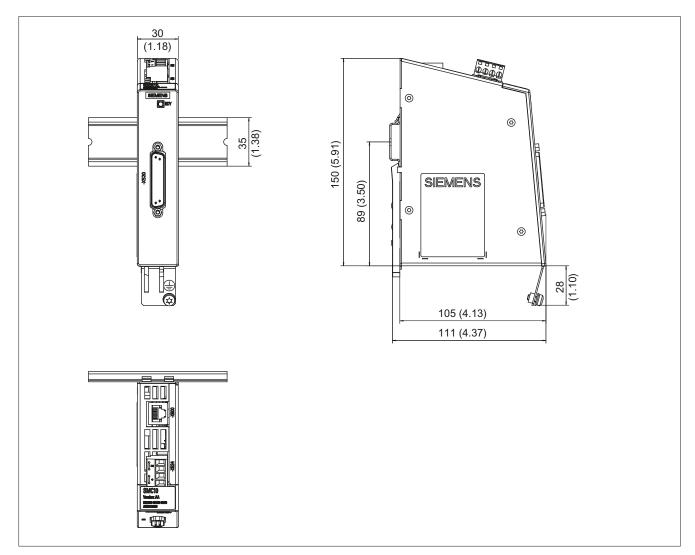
Dimension drawing of the Sensor Module Cabinet SMC10, all dimensions in mm and (inches)
